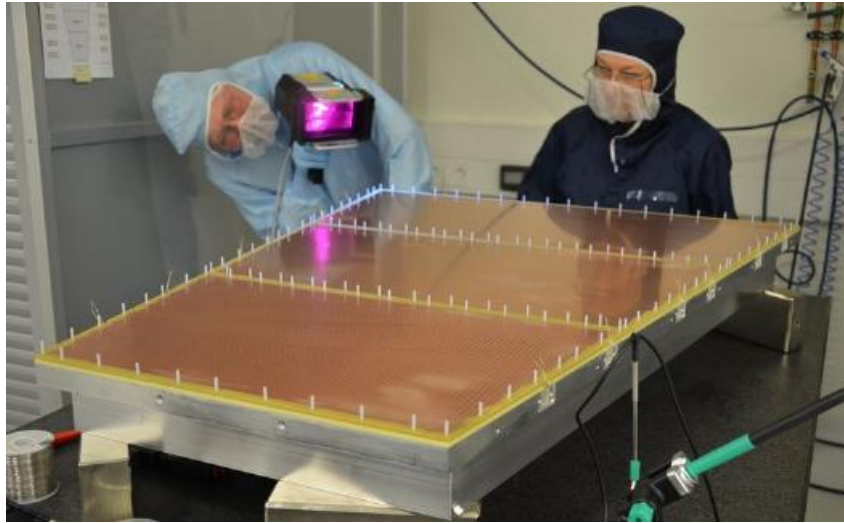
Chamber body before GEM installation. Readout pad planes of the three stacks and nylon bolts for GEM mounting are visible. The pad planes are inspected under UV light.
